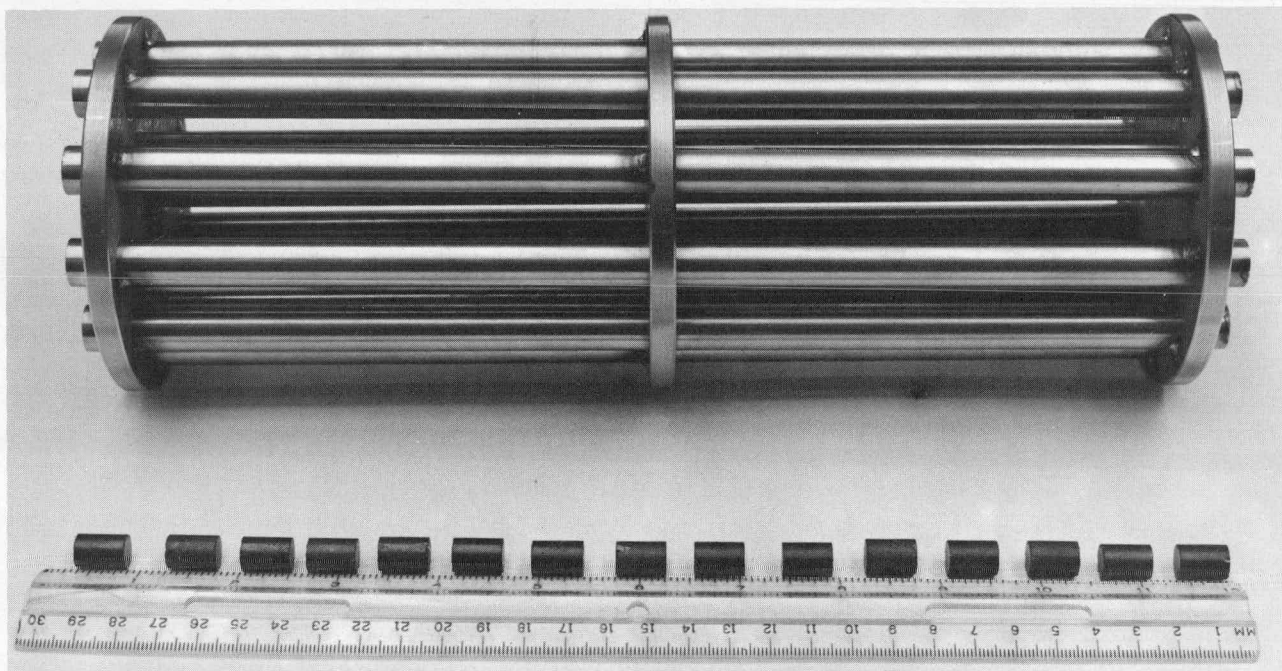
Simulated Stainless Steel Fuel Assembly Used in Process Head-End Experiments.
